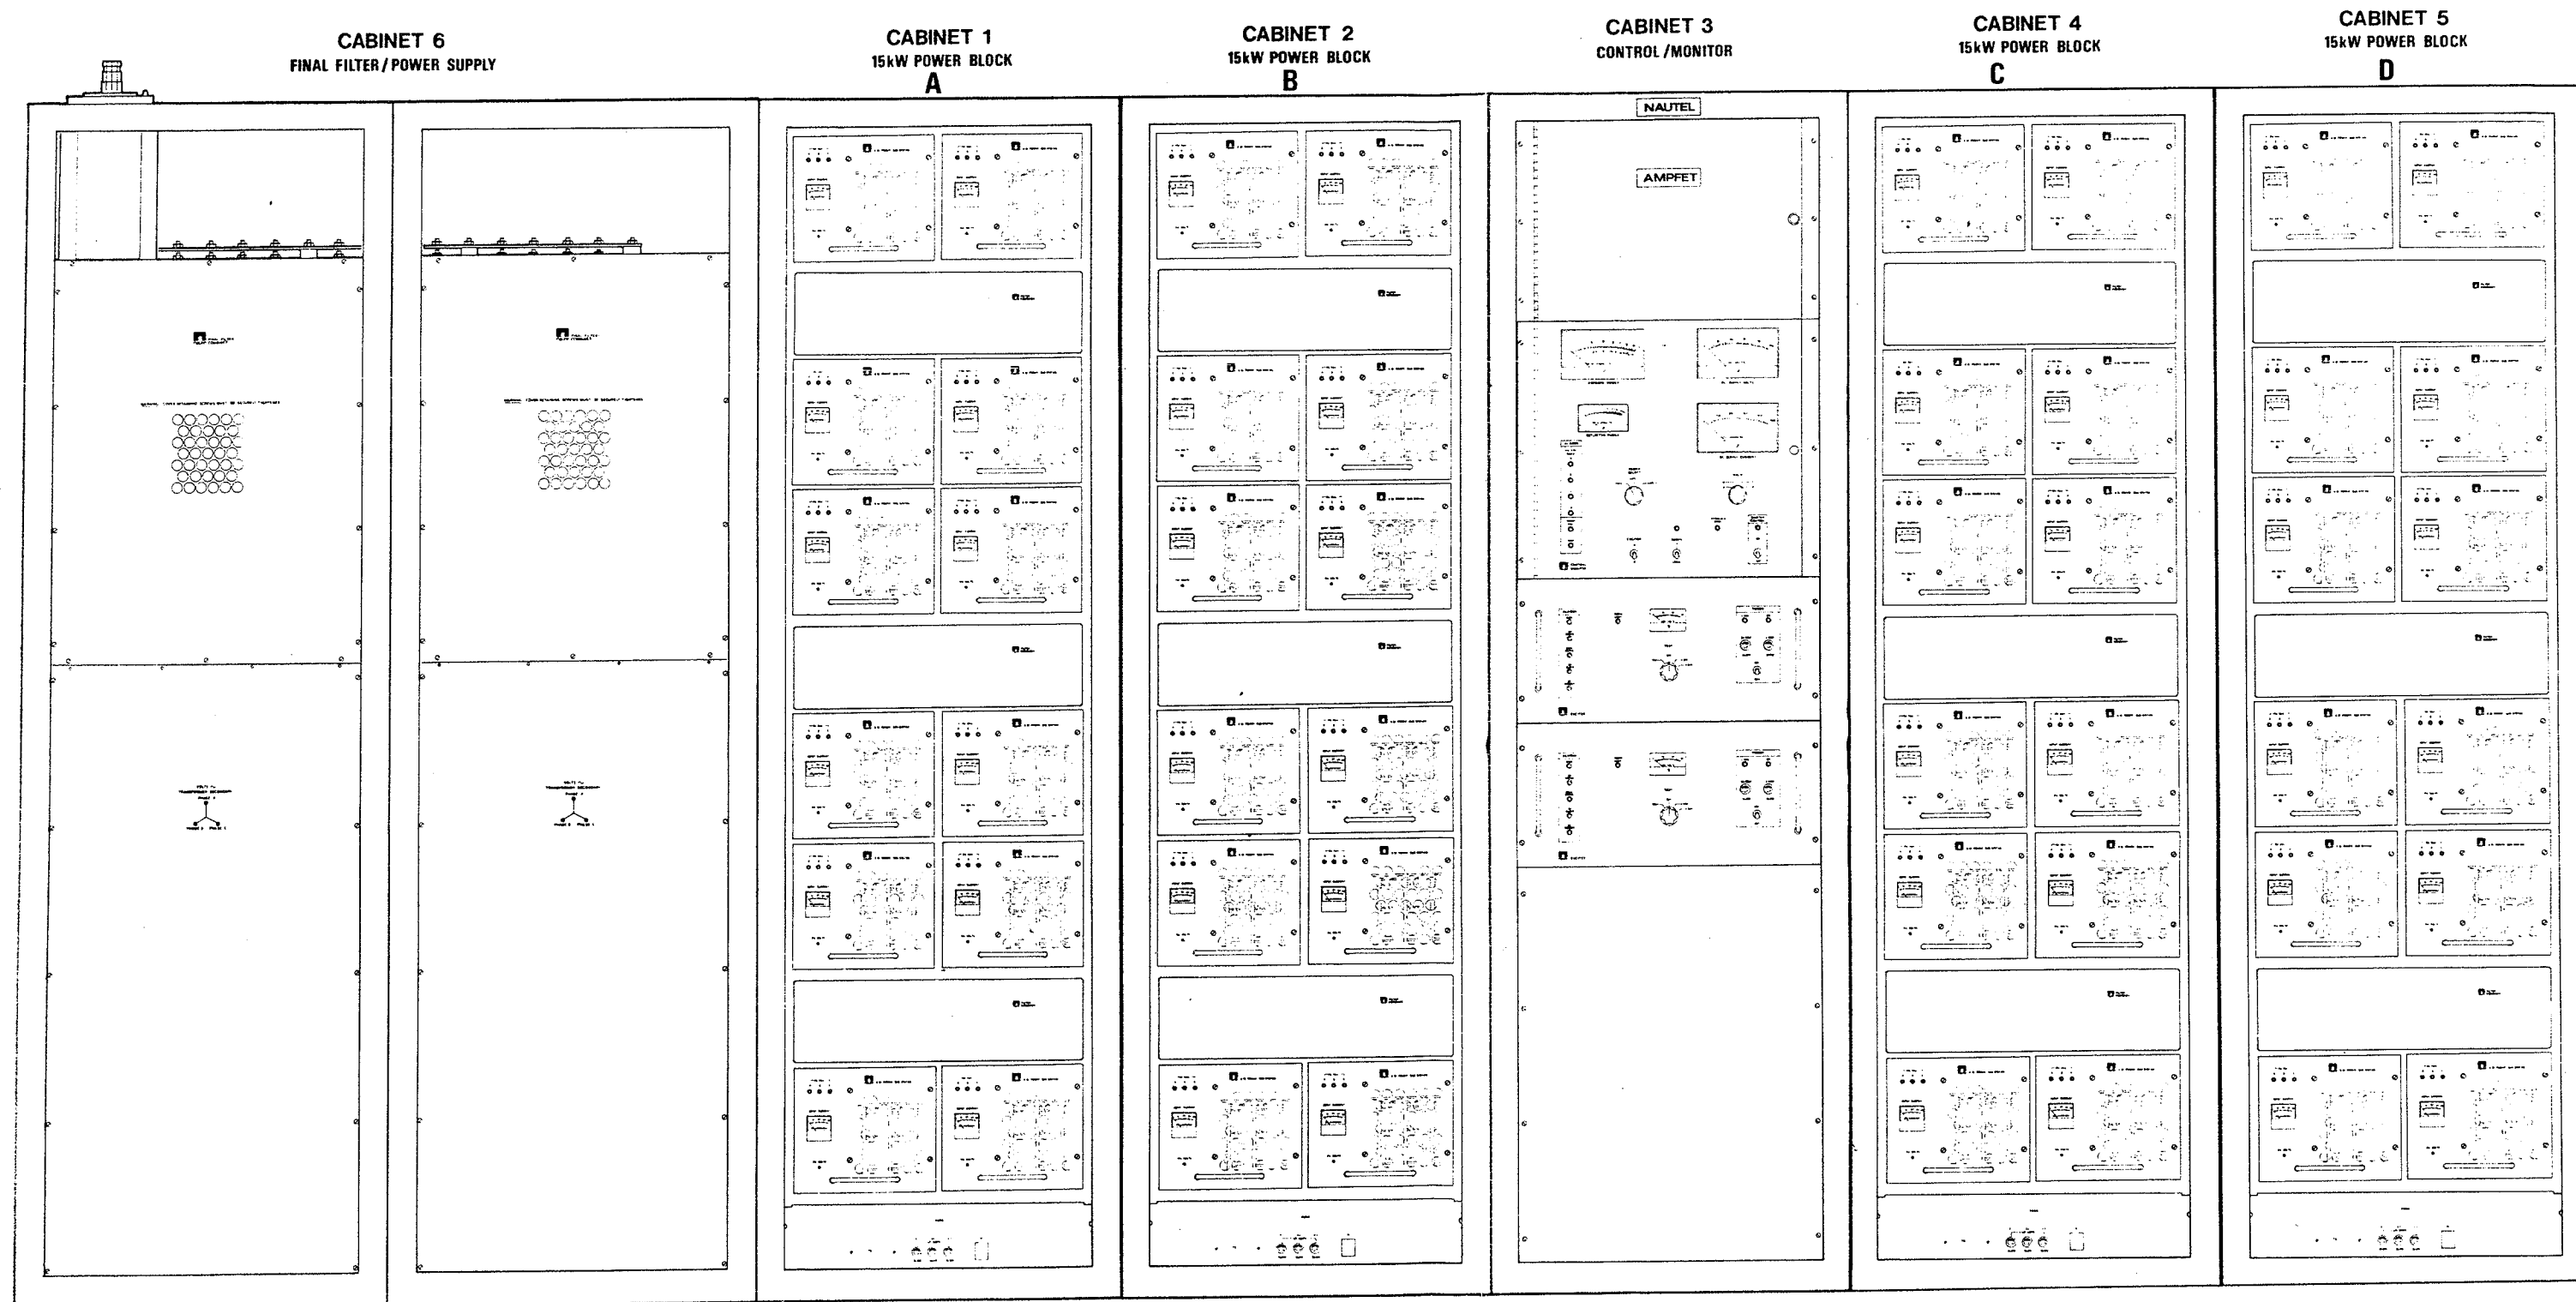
Assembly Detail - AMPFET 50 Transmitter (Front View)
